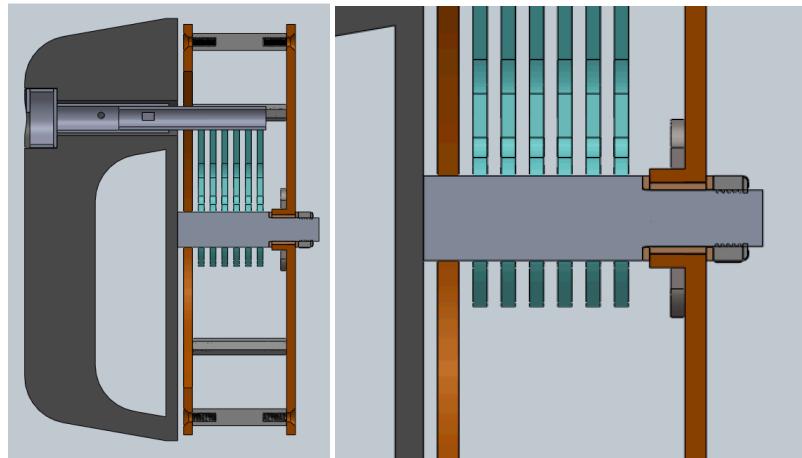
Section view of the resistance puck showing the redesigned shaft and bearing assembly
